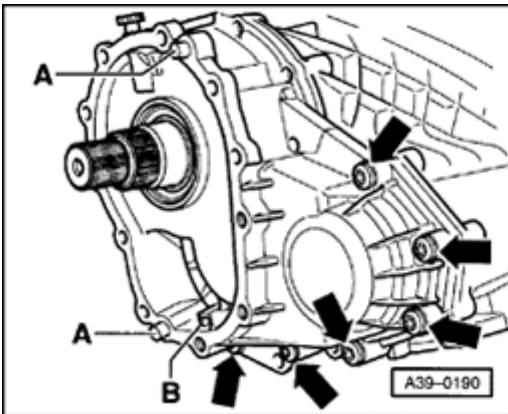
Seal In Front Final Drive Intermediate Flange, Replacing
